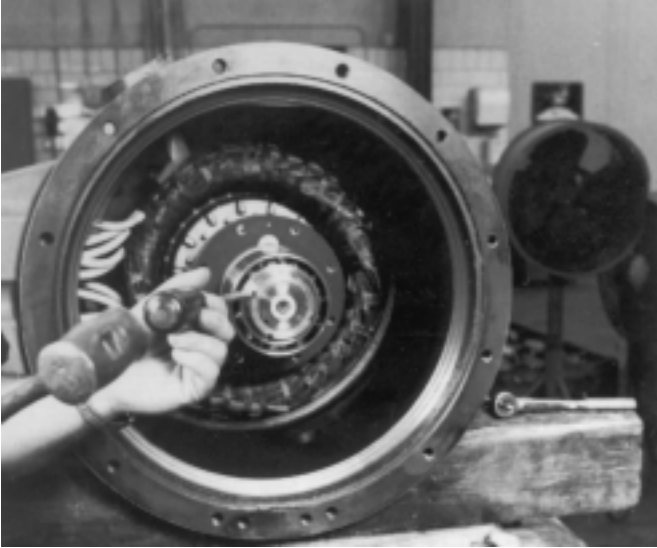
Using socket tool to remove locknut (non-extended capacity compressors)
